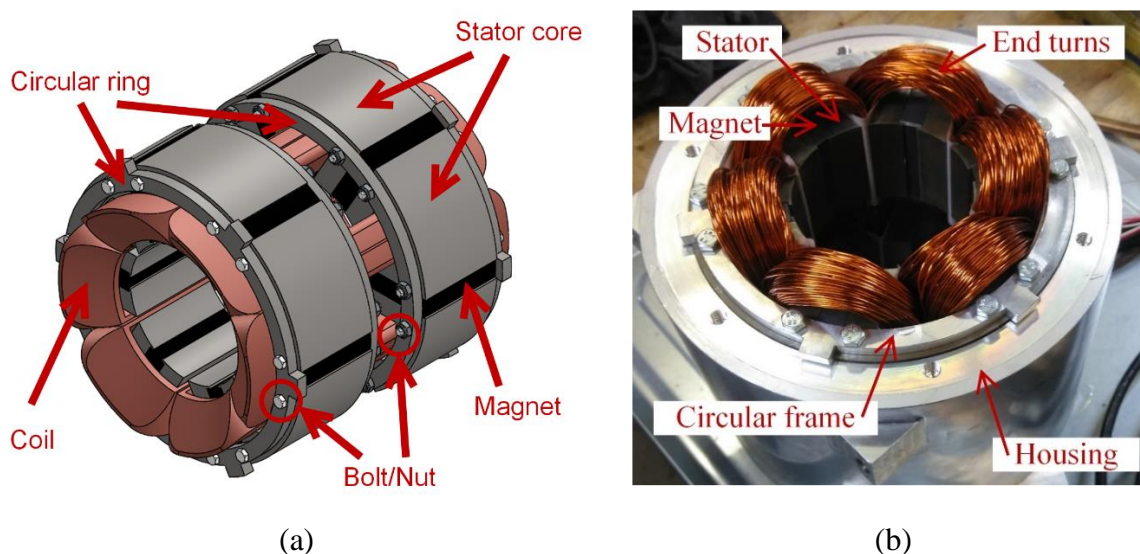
Stator assembly of the DLCW 6/4 FSPM machine (a) CAD drawing and (b) Actual stator assembly photo
